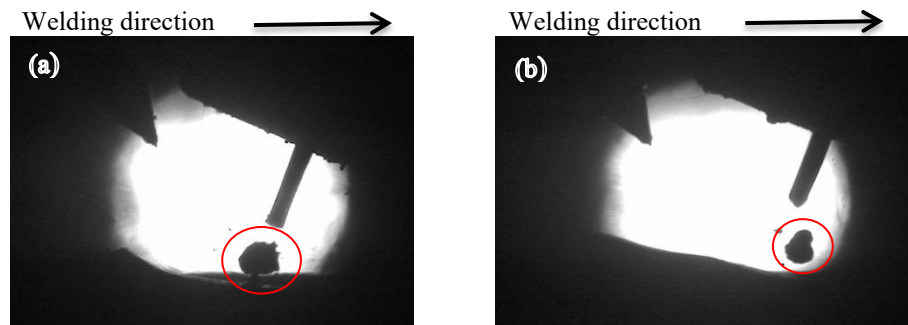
Droplet transfer mode in (a) only MIG welding (b) TIG/MIG hybrid welding
